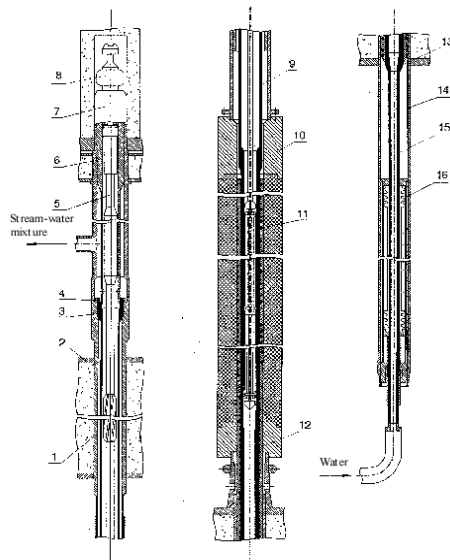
Fuel channel. 1 - protective screw plug; 2 - structure "E" upper plate; 3 - FC housing in structure "E"; 4 - Leak tight weld; 5 - FA suspension unit; 6 - upper FC housing; 7 - FC cartridge; 8 - FC plug; 9 - FC upper part TK; 10 - upper steel-zirconium adapter; 11 - FC middle part; 12 - lower steel-zirconium adapter; 13 - screwed support; 14 - lower FC housing; 15 - FC lower part; 16 - compensating bellow
